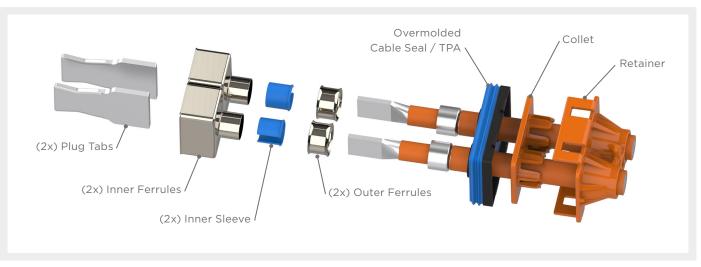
The HC-STAK 25 plug harness is adaptable to multiple cable sizes and conductor materials.
